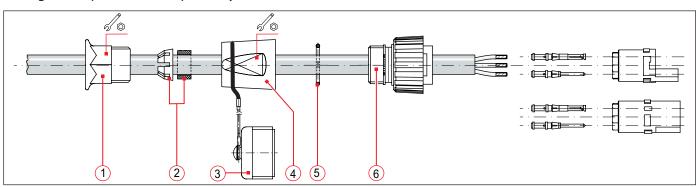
Example for plug with thread, back shell and cable gland (applies also for receptacles with thread)
